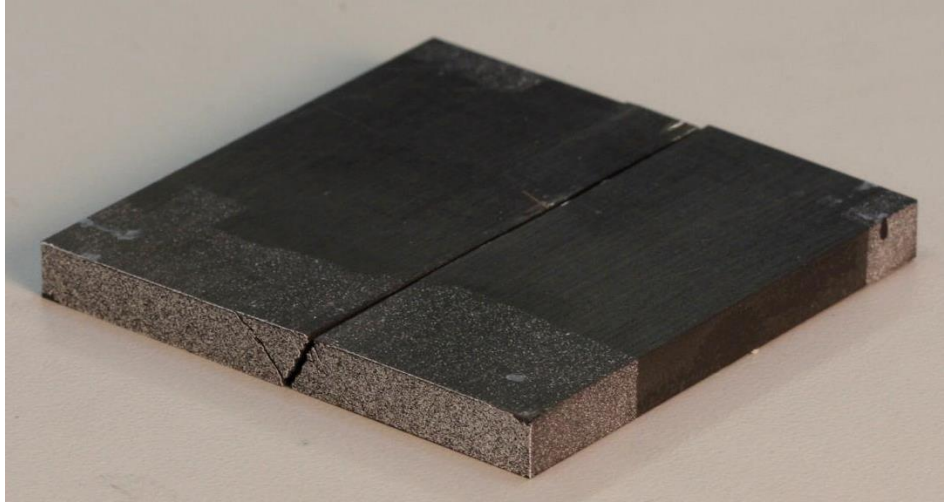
Typical failure of a unidirectional small-plate torsion specimen.
